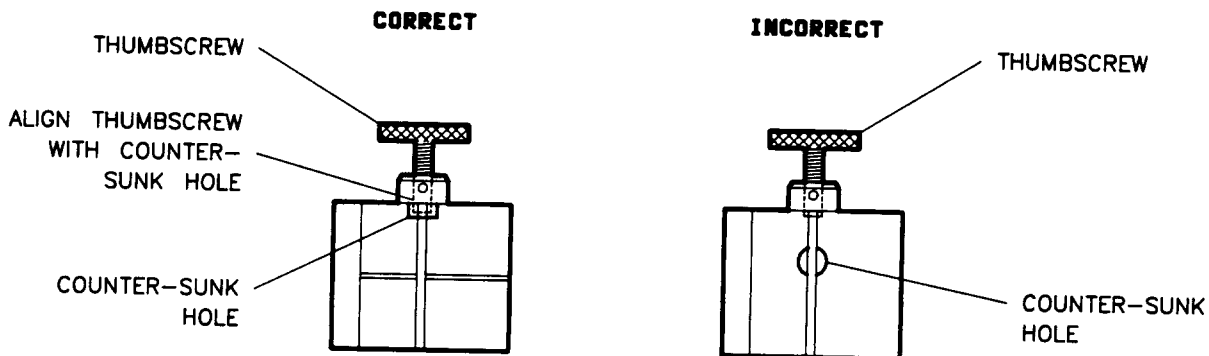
Aligning the Thumbscrew With the Counter-bored Hole
